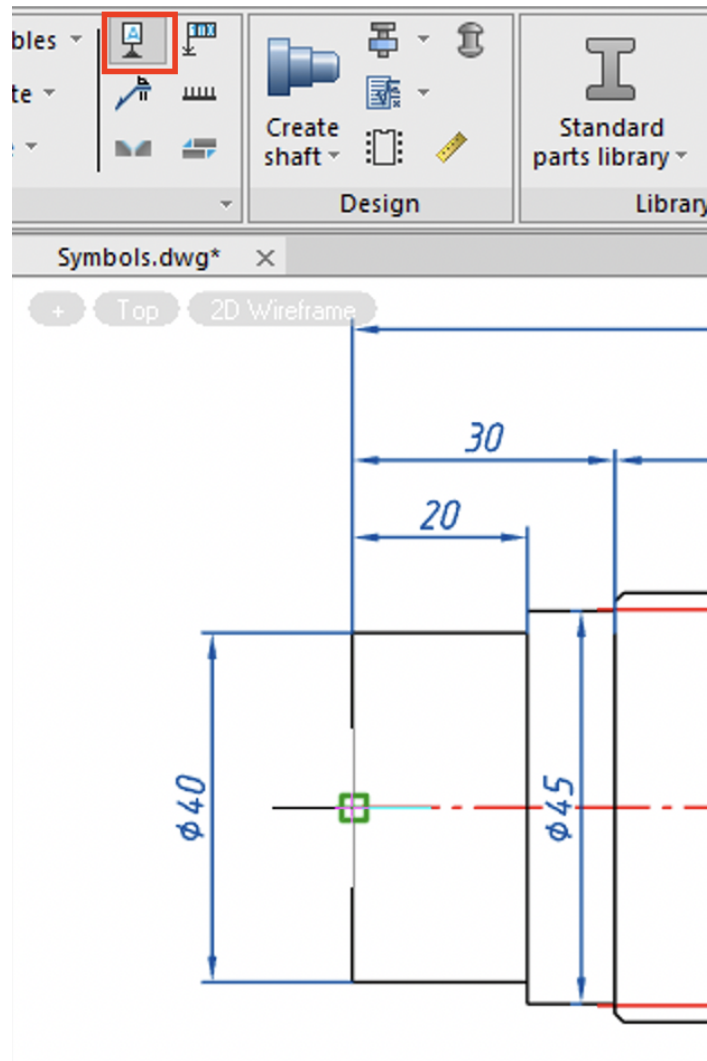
Endpoint on the shaft axis to insert the datum symbol
